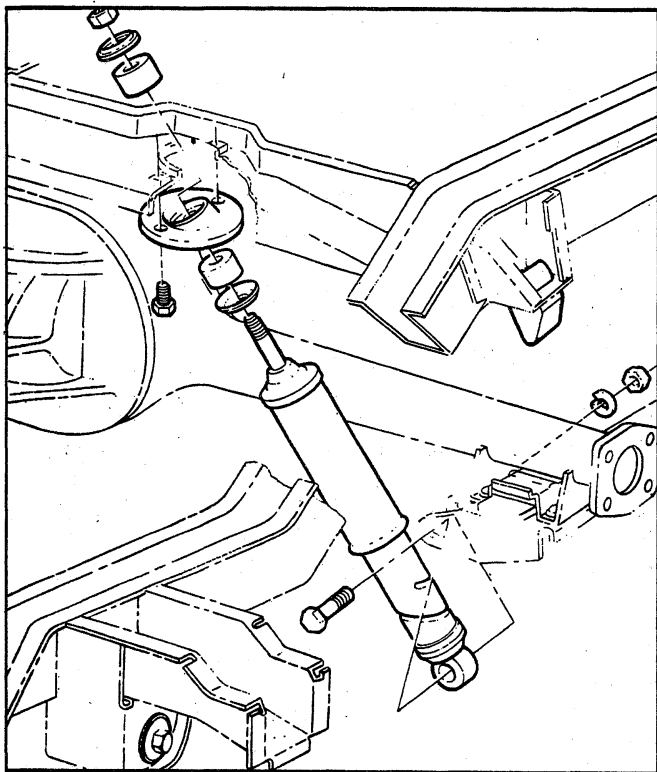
Shock Absorber Mounting—Exploded View (Chevy II)
